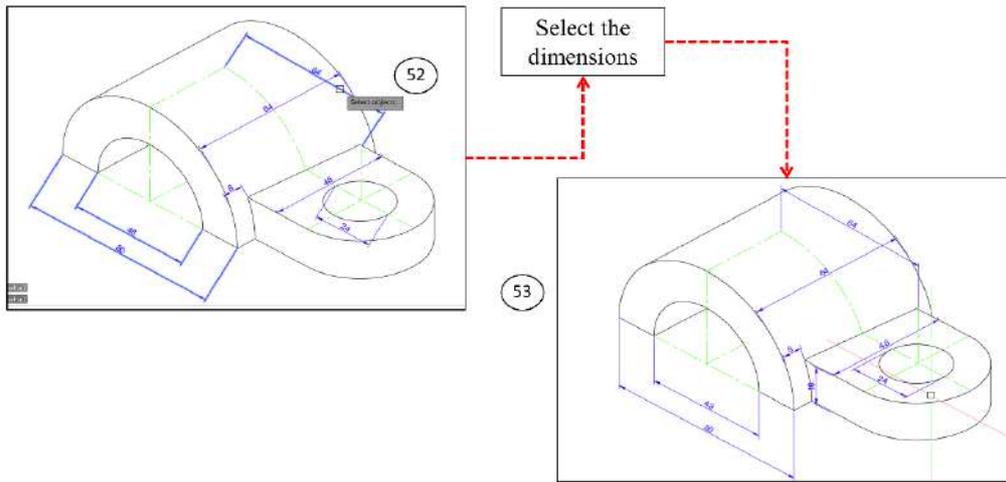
Example of an isometric drawing (Step 52 and 53)
